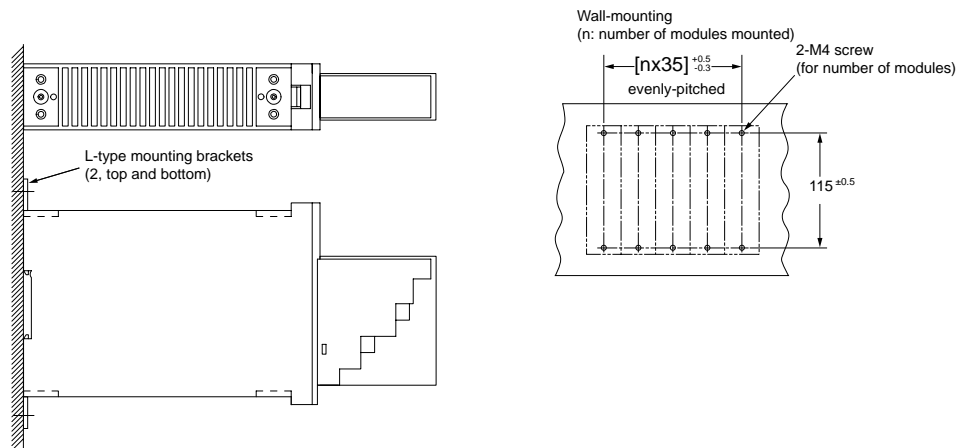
Dimensions for Panel Mount and Wall Mount
